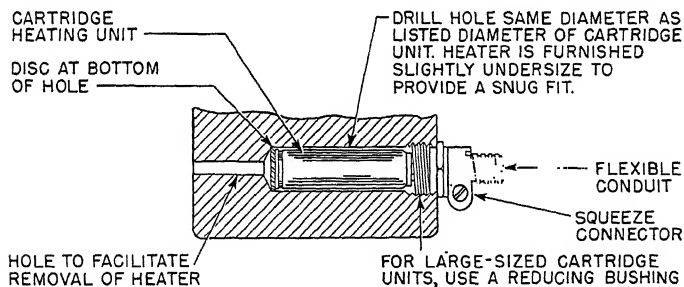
Arrangement of cartridge heater in plate. (Courtesy Westinghouse Electric and Manufacturing Company.)
